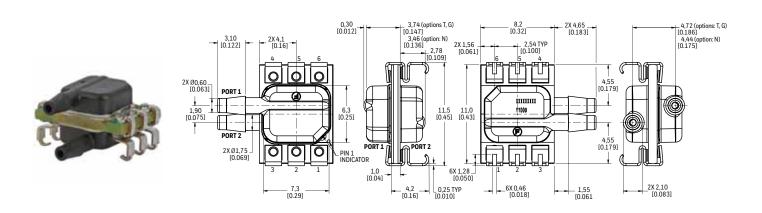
SMT PACKAGE DIMENSIONAL DRAWINGS (CONTINUED
